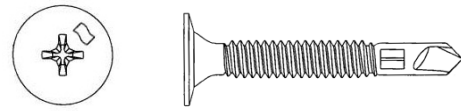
#10-24 PHILLIPS WAFFER HEAD TYPE 10 SCREW (#12-24 TYPE 11 SCREW SIMILAR)
